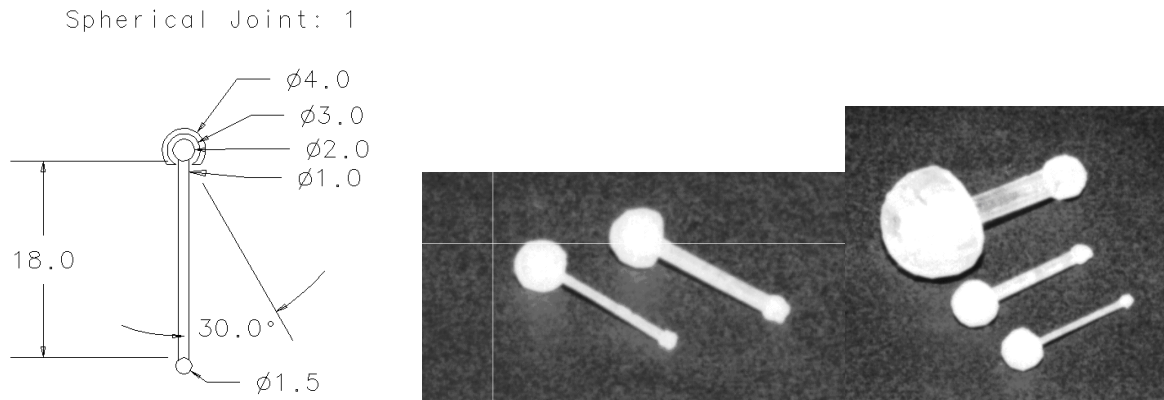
Type II of Spherical Joints (all dimensions are in mm)
